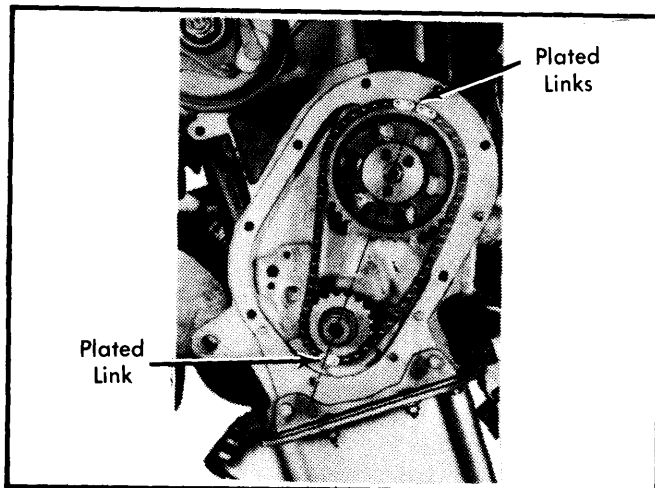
Proper Alignment of Camshaft and Crankshaft
